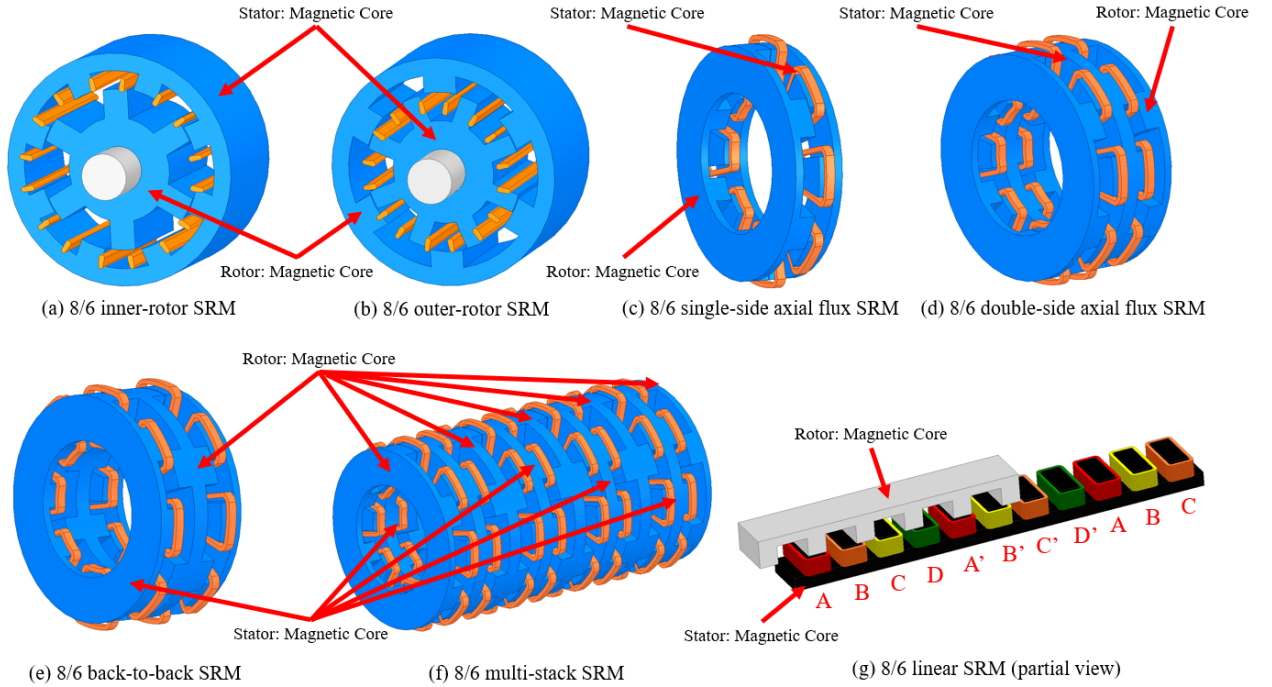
Sample drawings of multiple type SRMs: a) 8/6 inner-rotor SRM b) 8/6 outer-rotor SRM c) 8/6 single-side axial flux SRM d) 8/6 double-side axial flux SRM e) 8/6 back-to-back SRM f) 8/6 multi-stack SRM g) 8/6 linear SRM (partial view).
